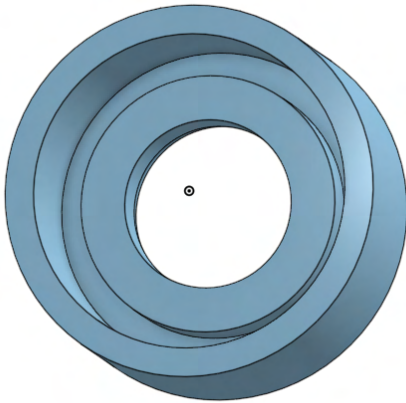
CAD model of the adapter that is used to keep the O-ring in place.
